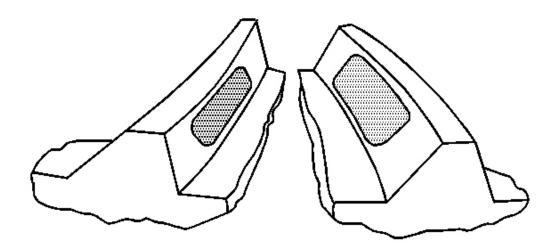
Identifying Correct Gear Tooth Contact Pattern Courtesy of GENERAL MOTORS CORP.
